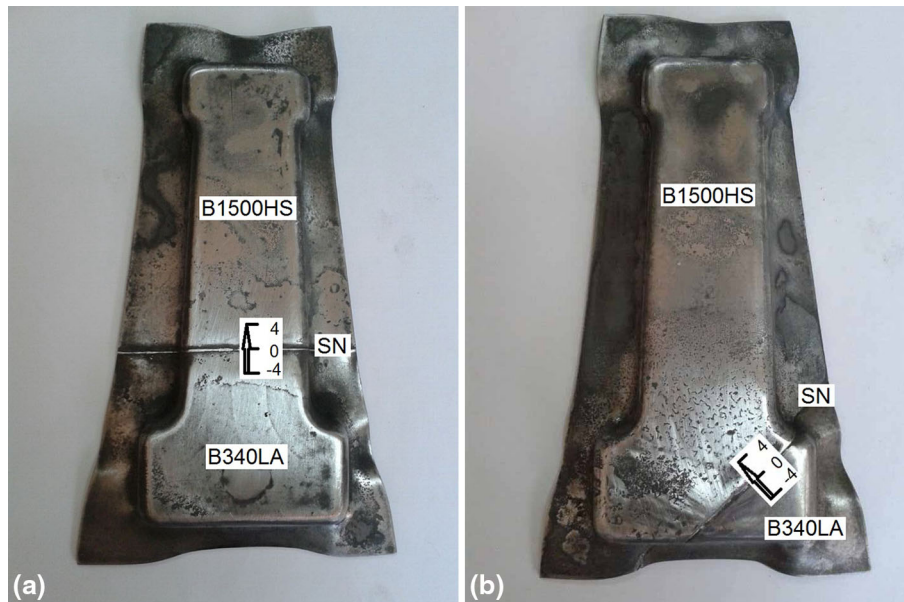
Hot stamped mini b-pillars: (a) with weld seam SN-A and (b) with weld seam SN-B
